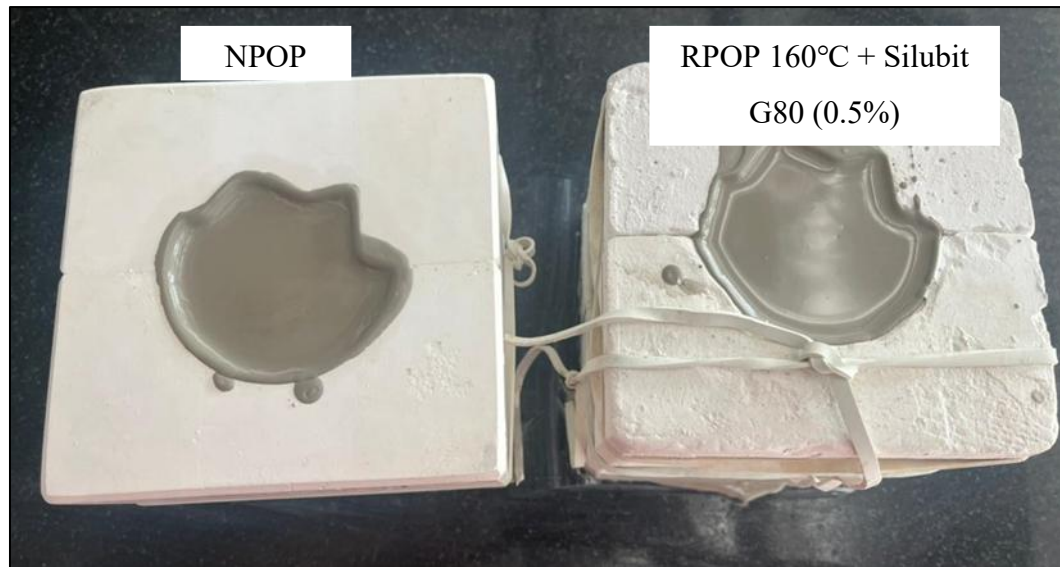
Two Different Mould Casting Using Stoneware Slip
